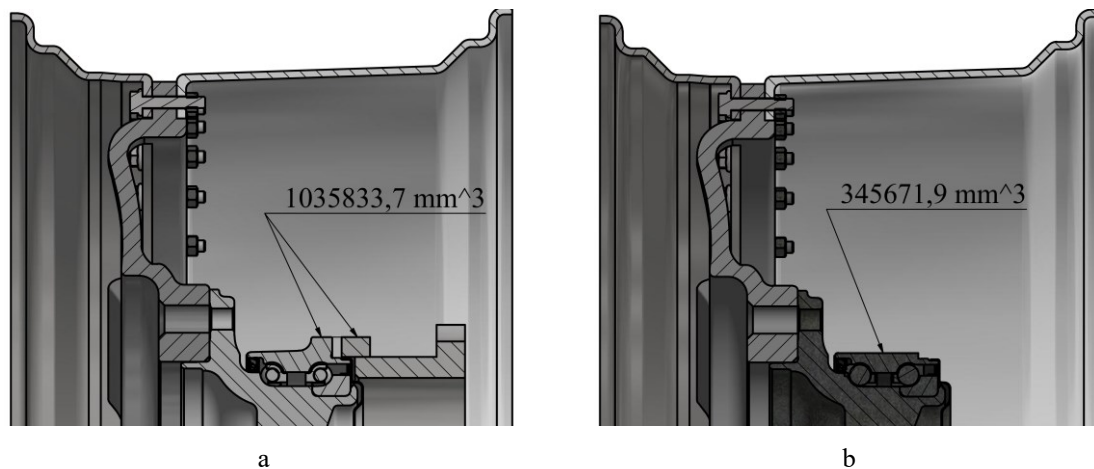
Variants of the integration for the wheel hub bearing: a - Non-modified wheel hub bearing unit, b - Modified wheel hub bearing unit
